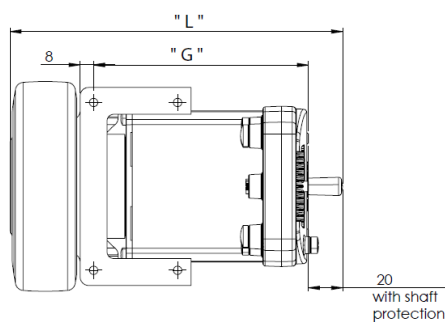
Overall dimensions – ‘SWD® 125 2-stages’
